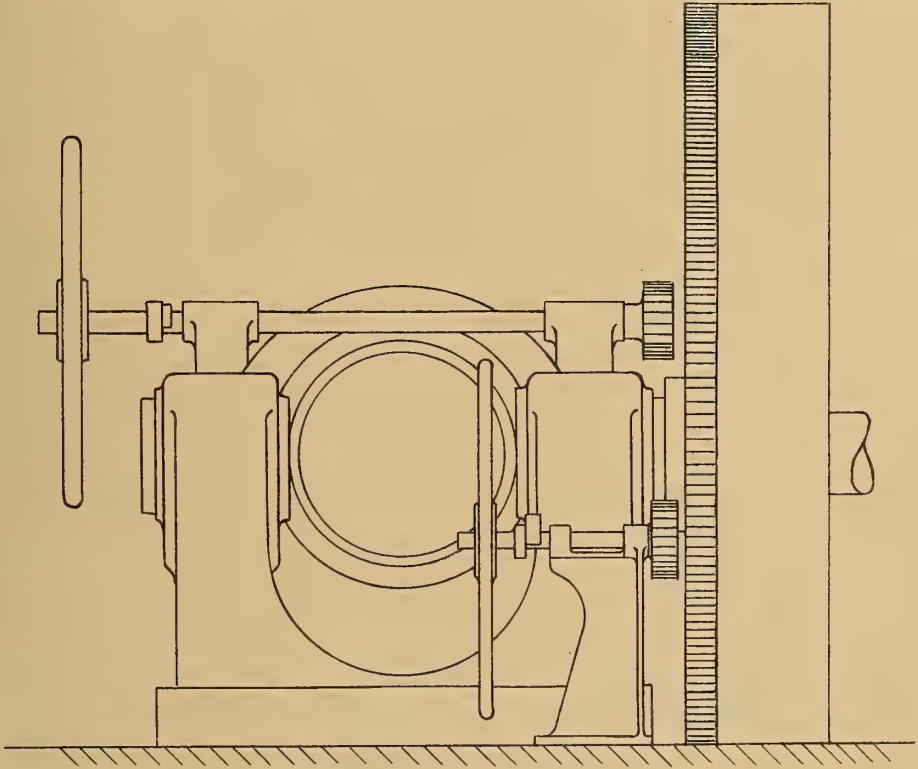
ACME AND CROSSLEY BARRING GEAR
